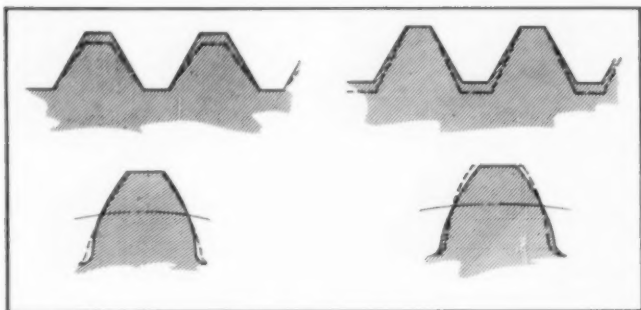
(left). This gear tooth form is the result of grinding the hob in such a manner that a hook or positive rake is produced. At right is a tooth form with a larger pressure angle—the result of sharpening a hob with a negative rake.
